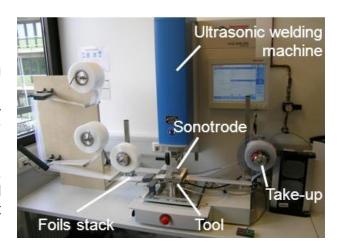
Automatic roll-to-roll ultrasonic hot embossing machine [44].
